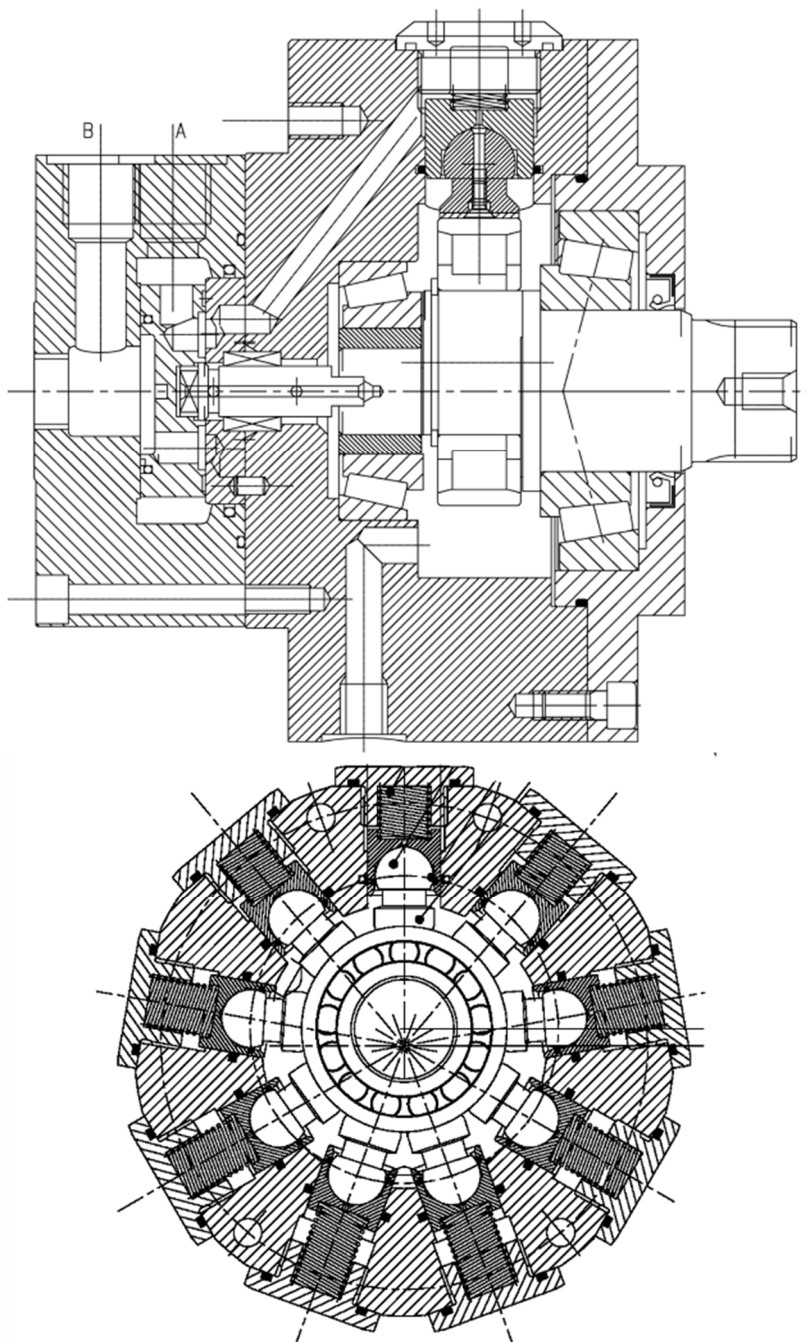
Axial and cross-section views of the manufactured expander.
